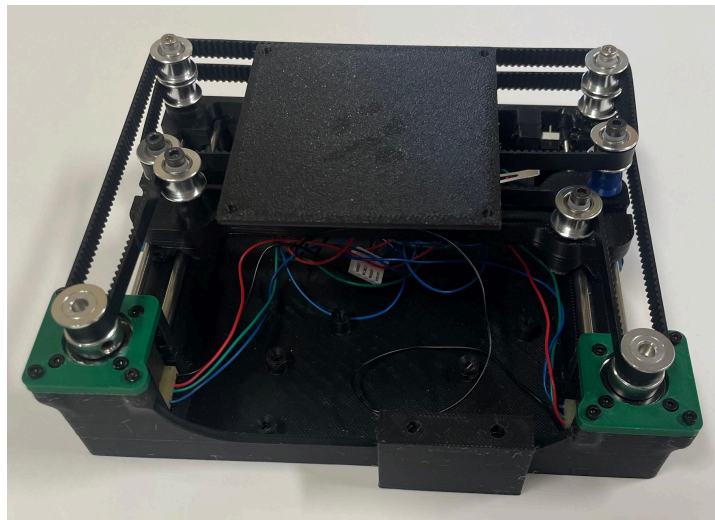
Final Prototype for X-Y Axis of Linear Rod Design Front View
